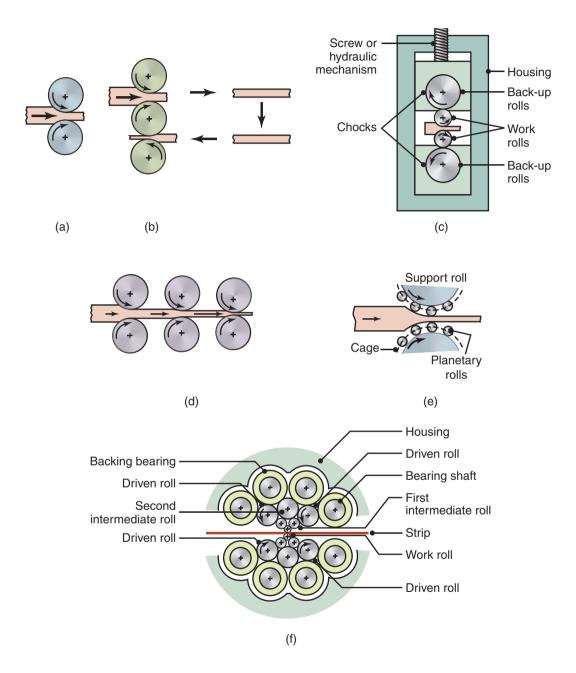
Schematic illustration of various roll arrangements: (a) two-high mill; if a two-high mill is used for thick but short workpieces, it will commonly roll a billet back-and-forth in multiple passes, known as a reversing mill; (b) three-high mill with elevator for multiple passes; (c) four-high rolling mill showing various features. The stiffness of the housing, the rolls, and the roll bearings are all important in controlling and maintaining the thickness of the rolled strip; (d) tandem rolling, with three stands; (e) planetary mill; and (f) cluster mill, also known as a *Sendzimir* or Z-mill.
